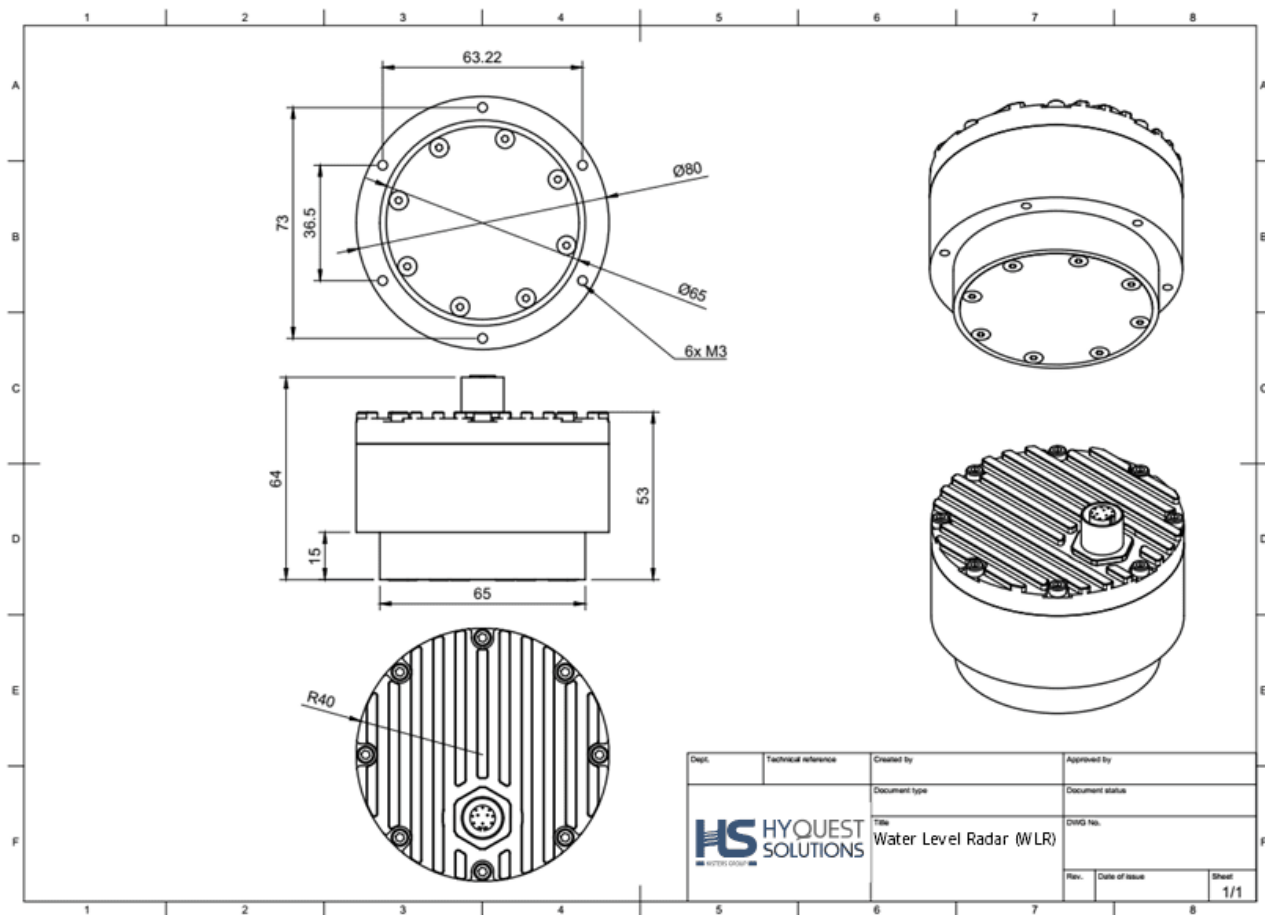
HS Water Level Radar (WLR): Mechanical Drawing, all dimensions in mm (1 mm = 0.00328 ft or 0,0393701 inch)
